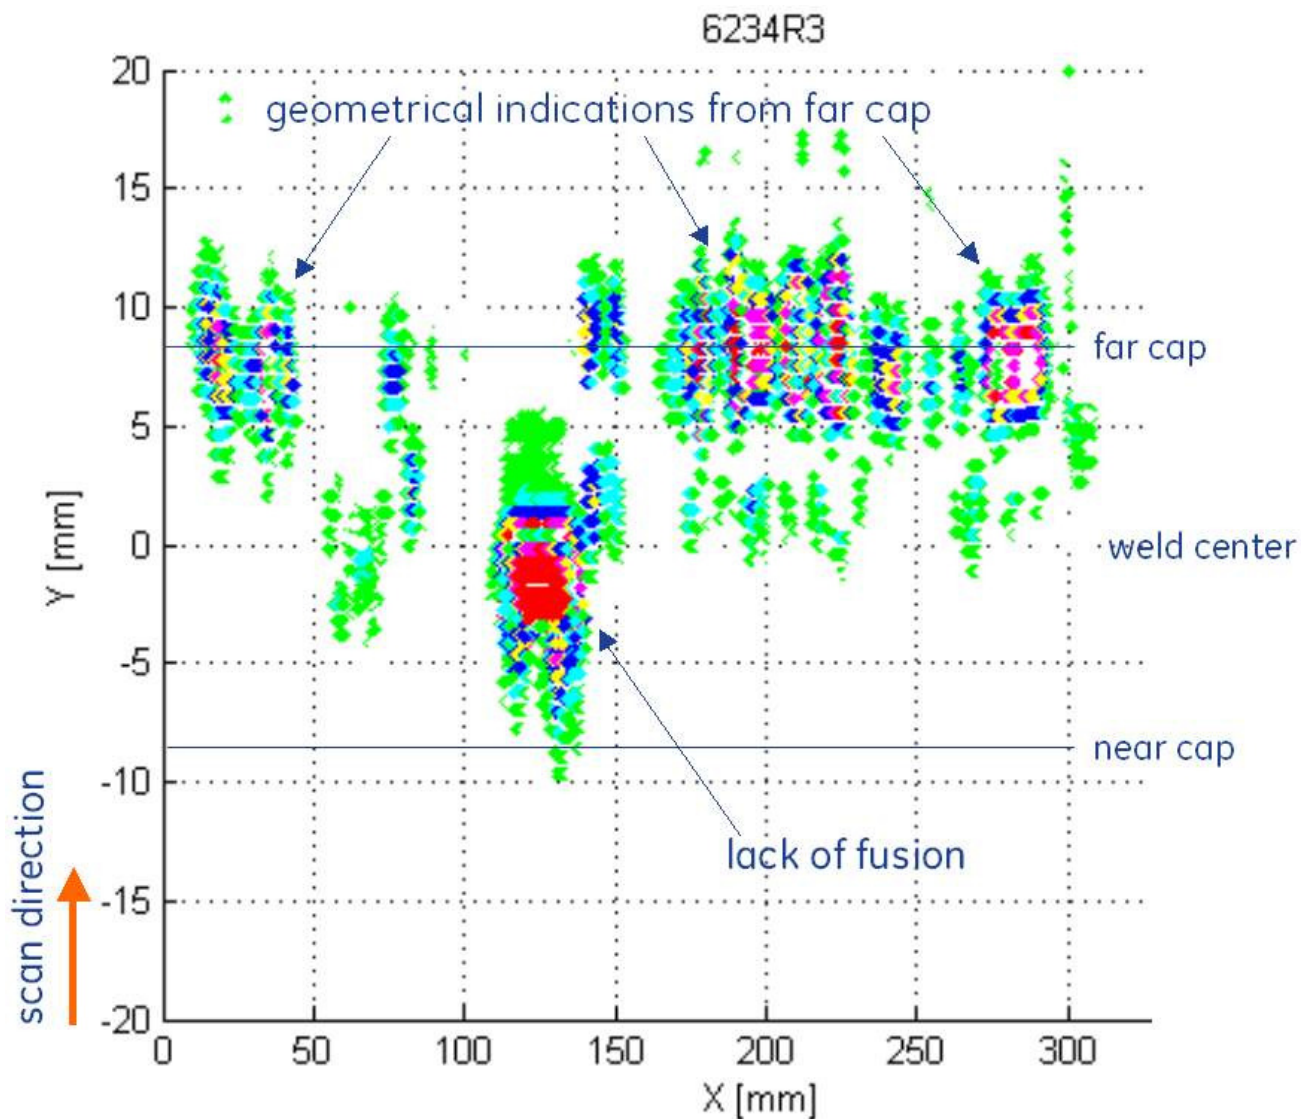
C-scan (top view) image of weld 6234 (MATLAB)
